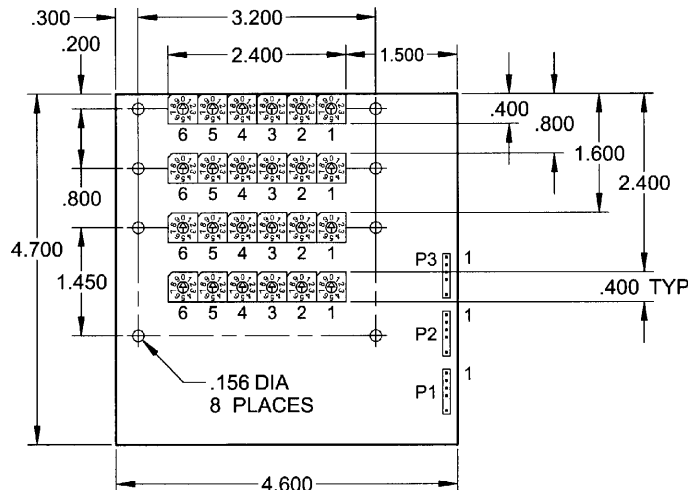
AA1754 Quad Board Counter Dimensions Drawing
